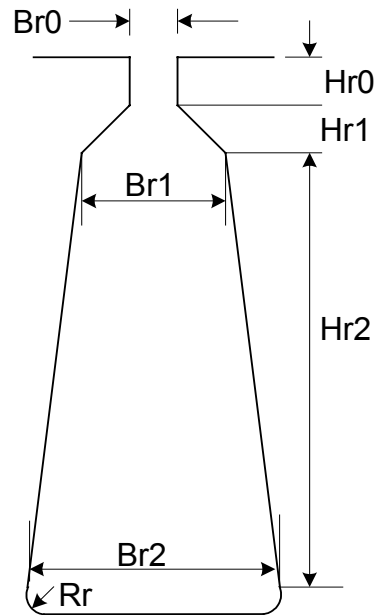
Rotor slot dimensions of the buried magnet test motor.
